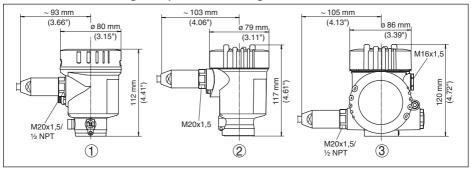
Housing versions with protection rating IP266/IP268 (12bar) - with integrated display and adjustment module the housing is 92mm/0.352in higher
